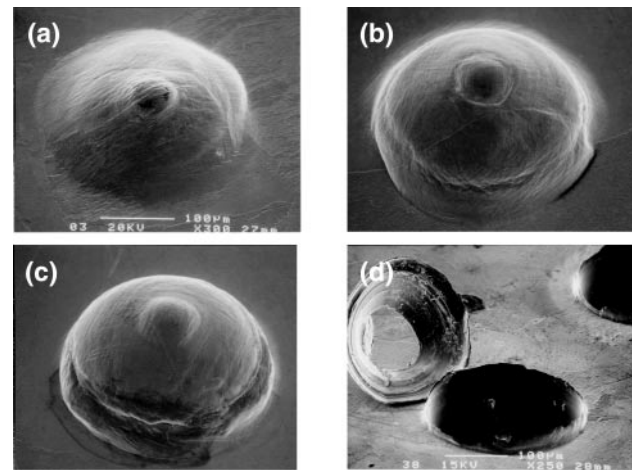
Burr formation processes: (a) plastic zone expanding from the centre to the edge; (b) initial fracture at the edge; (c) fracture spreading along the edge; (d) final burr with a drill cap
